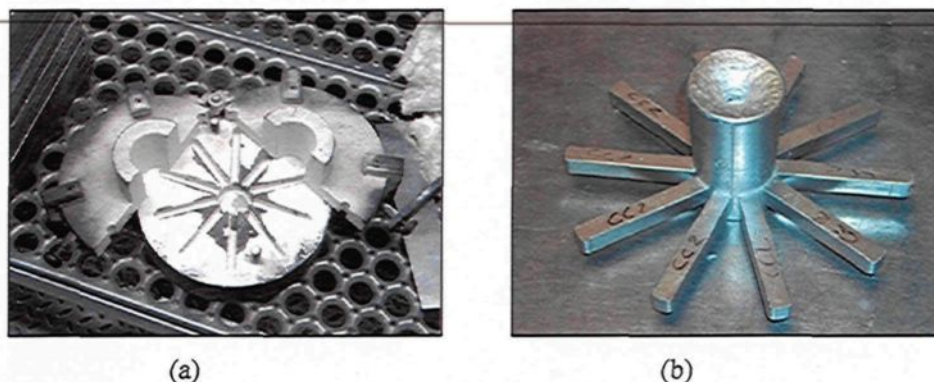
(a) Starlike mild-steel mold; and (b) corresponding impact test bar casting.
